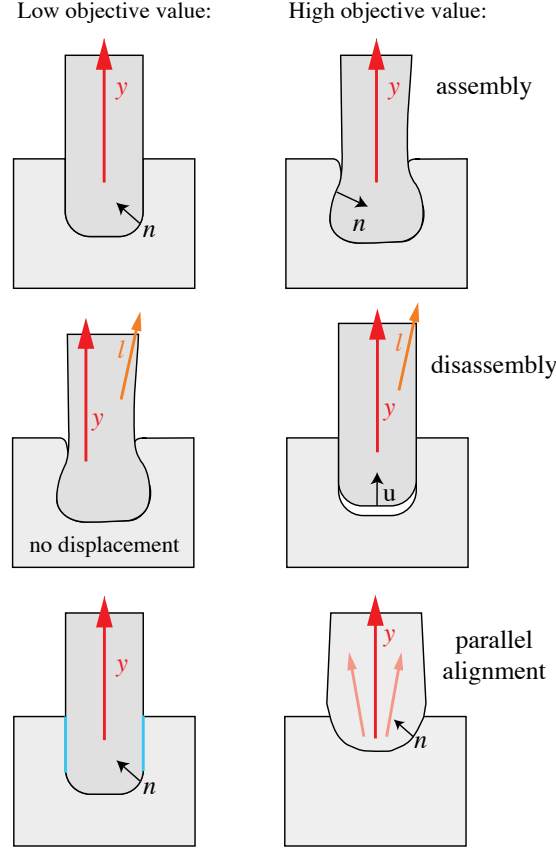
Assembly, disassembly and parallel alignment objectives. Top: left shape is easy to assemble in $-y$ direction, while shape on the right cannot be assembled without effort (high objective value, due to normals pointing in the direction opposite to y). Middle: For the same disassembly direction y , and user-defined load l , the assembly on the right falls apart under the load; for the shape on the left, the parts cannot move apart in direction y under load l . Bottom: left shape has a large region parallel to disassembly direction (marked in blue), making it hard to disassemble in any direction other than y , while shape on the right allows for multiple easy disassembly directions (shown in light red).
